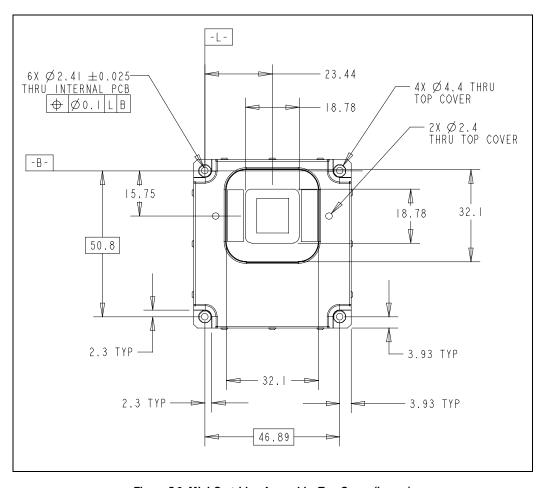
Mini-Cartridge Assembly, Top Cover (in mm)
